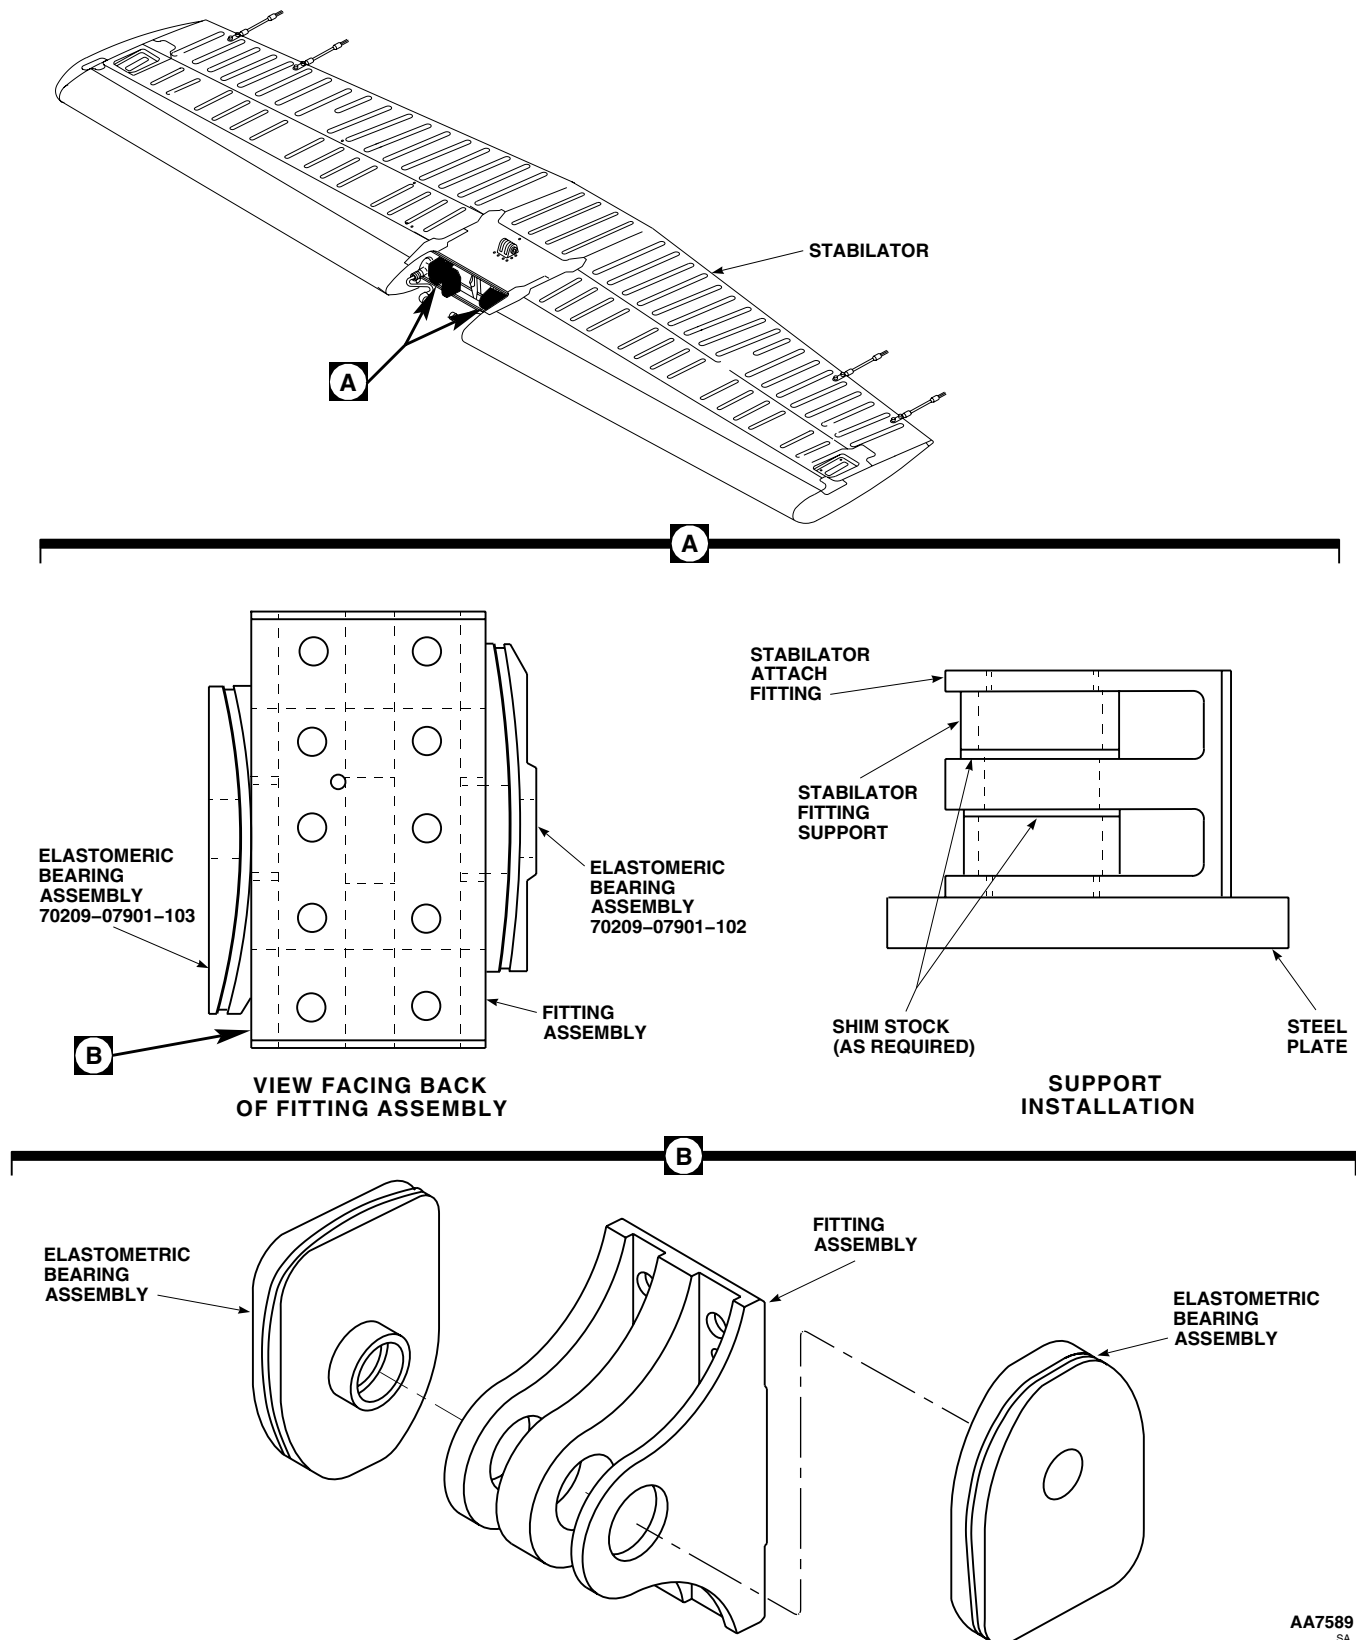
Replace Stabilator Elastomeric Bearing (AVIM).
